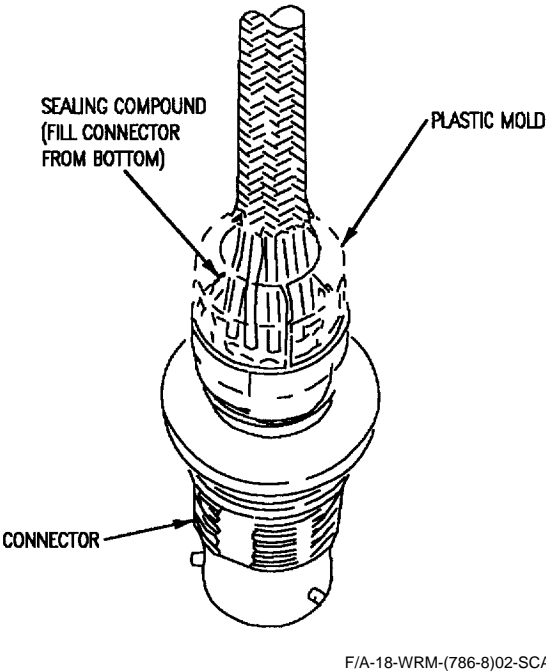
Filling Plastic Mold with MIL-S-8516 Type 1 Class 3 Sealing Compound
